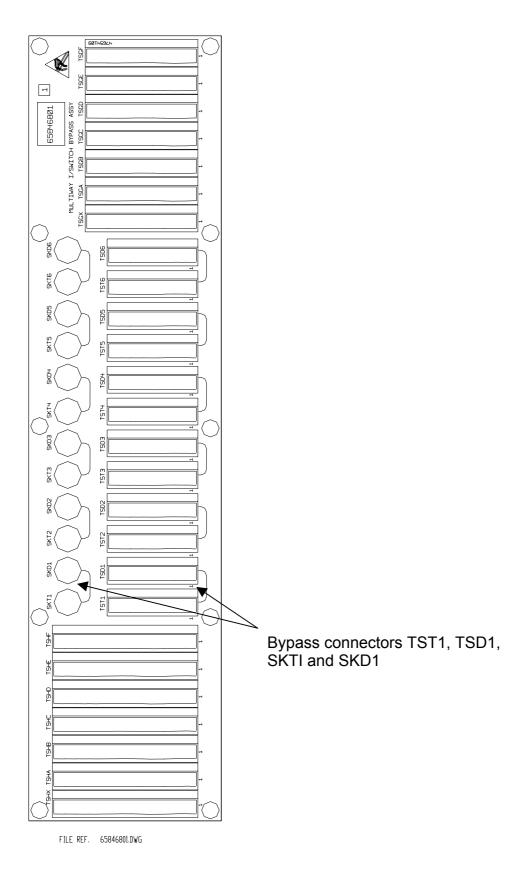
6-Way Interswitch Bypass PCB Assembly 65846801
